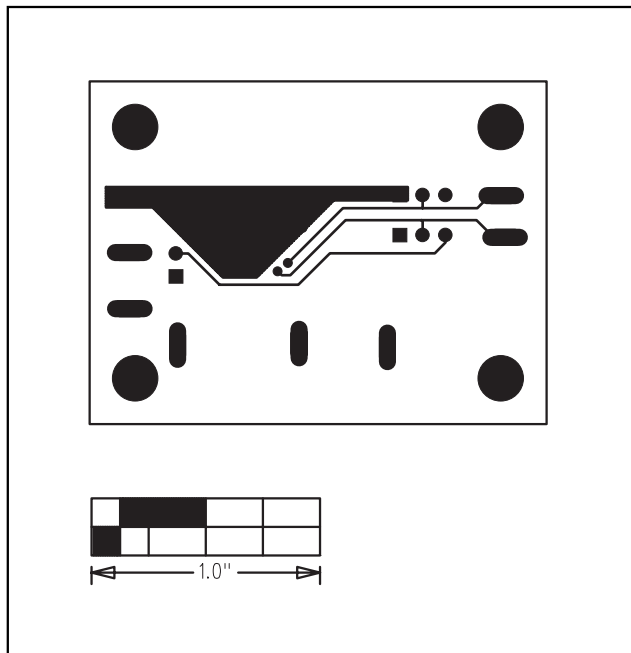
MAX1582 EV Kit PC Board Layout—Solder Side
